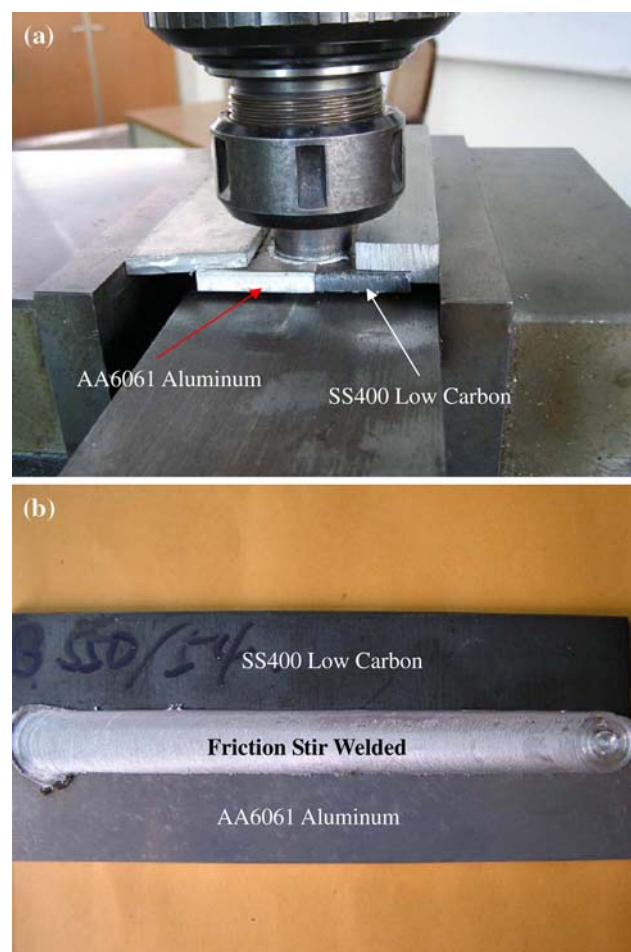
Dissimilar friction stir welding for butt joints; a Dissimilar metals being welded and b Dissimilar metals joints with AA6061 aluminum alloy and SS400 low-carbon steel
